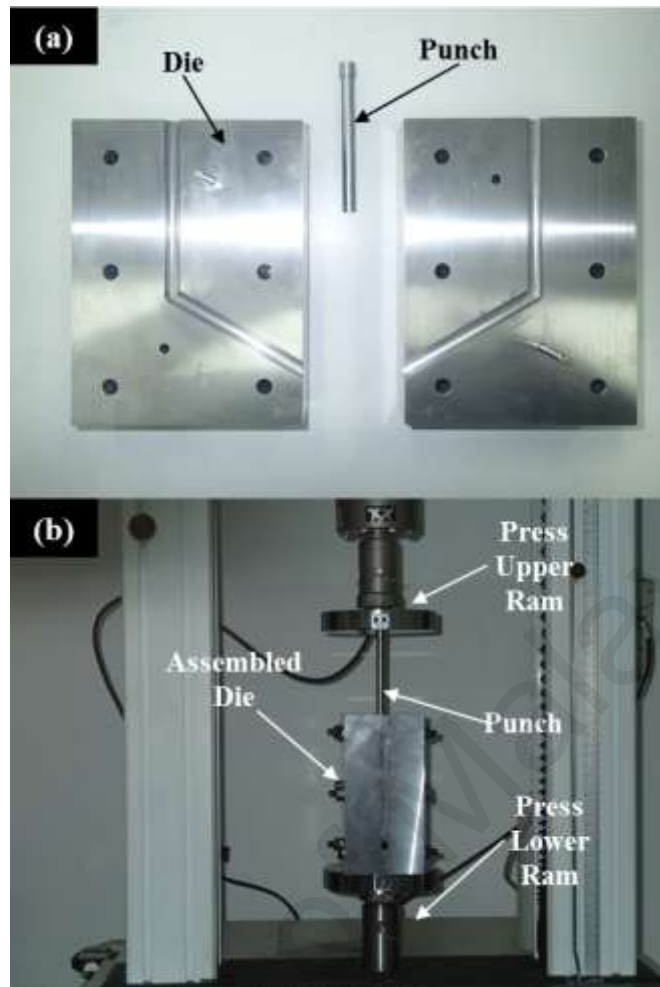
(a) Fabricated tool set and (b) initial ECAE set up
